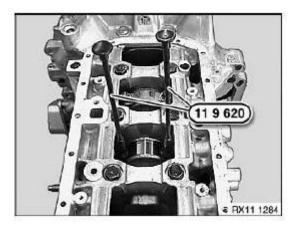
Identifying Special Tool (11 9 620) Courtesy of BMW OF NORTH AMERICA, INC.
